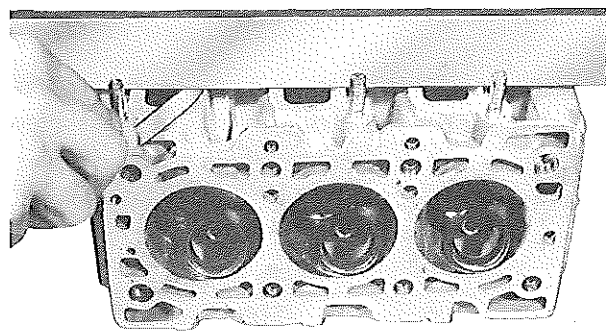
Checking exhaust manifold seating face for flatness.
